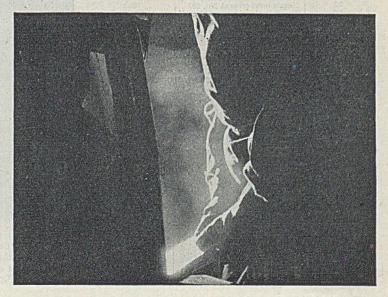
Combined System with the Centrifugal Fan; Close-up Grinding of Pig-iron showing good Dust Control. (Note Dust cut off by the Top Nozzle; see Line Sketch, Fig. 7.)
